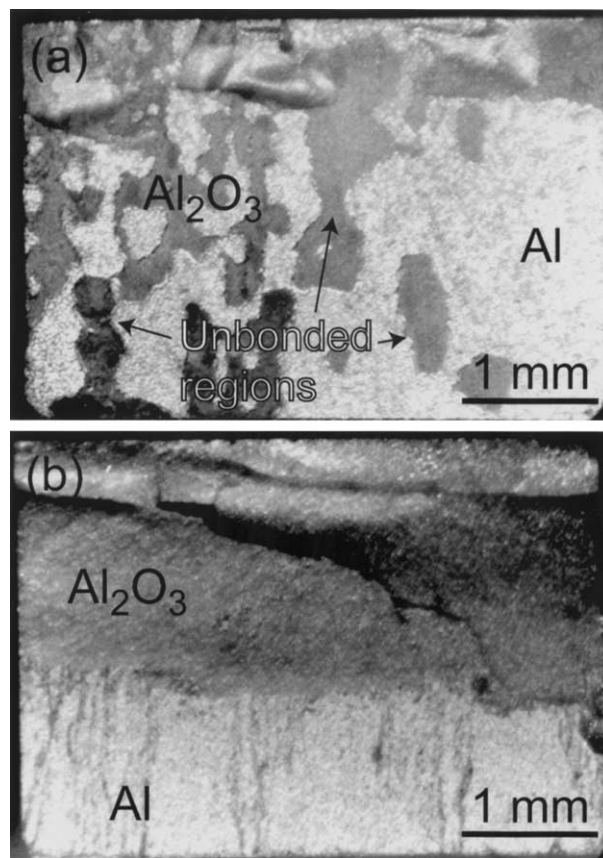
Fracture surface of joints bonded at 1200 °C (a) and at 700 °C (b). The fracture proceeded from the bottom to the top.
